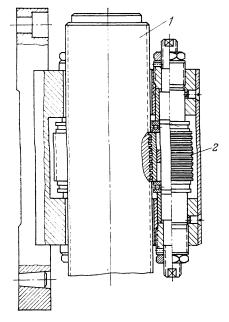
Screw with a roller-type nut: 1—screw; 2—roller
